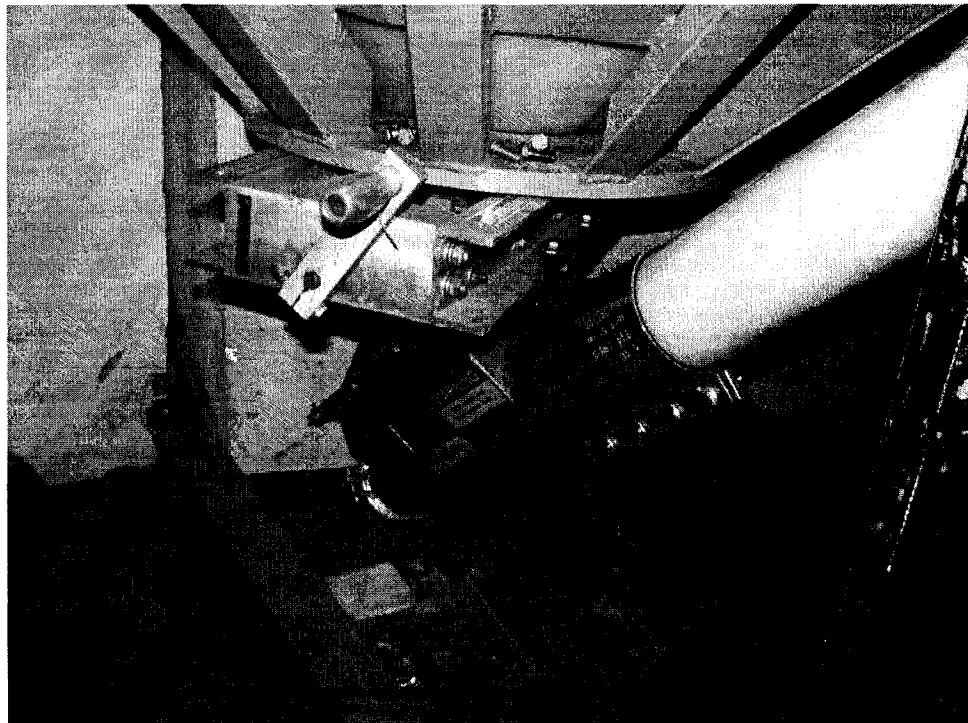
Interior feed transport charging adapter bolted to bottom of silo support.
